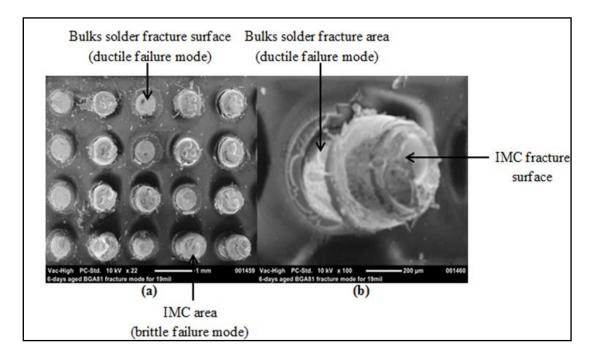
SEM of failure mode classification for 6-days aged 19mil pad size, with (a) bulk solder/IMC fracture, (b) IMC/bulk solder fracture
